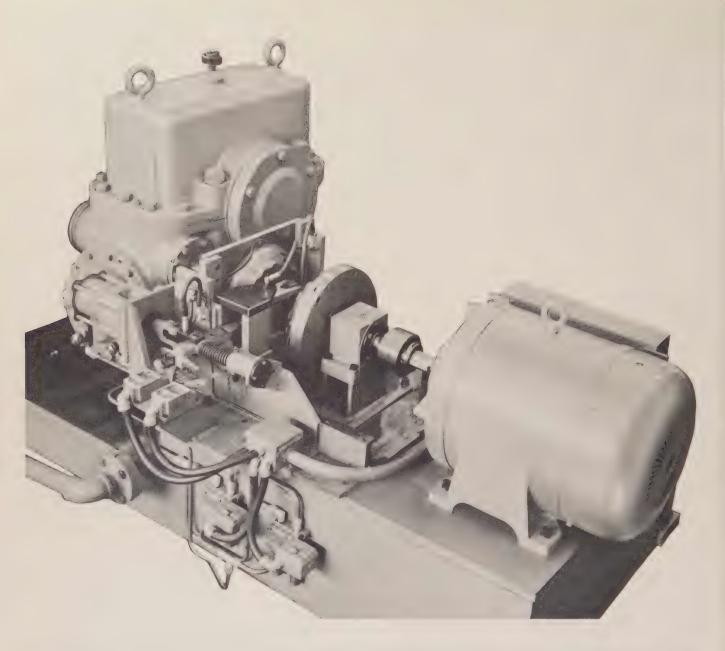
The dual drive and control system was used on an automatic assembly machine to assemble automotive cylinder heads. A 20 hp motor drives a speed
